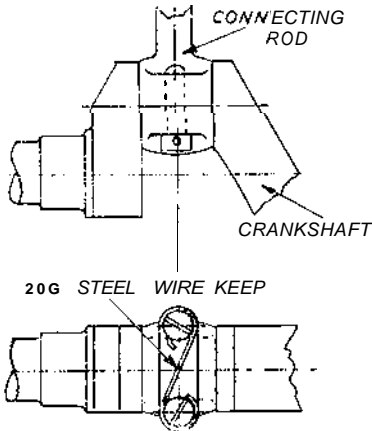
Use of steel wire keeps to secure crankpin bearing screws
